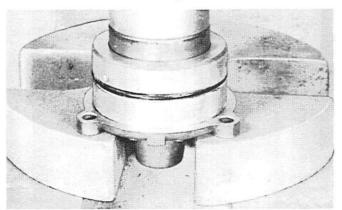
Installing End Cap Ball Bearings Section II - Powerhead Master Service Manual
